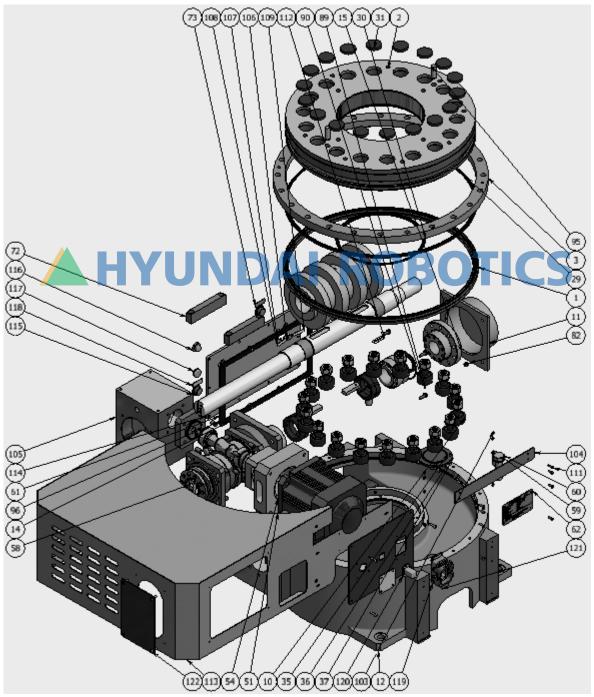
Exploded-View Drawing of the 2.5-Ton Positioner
